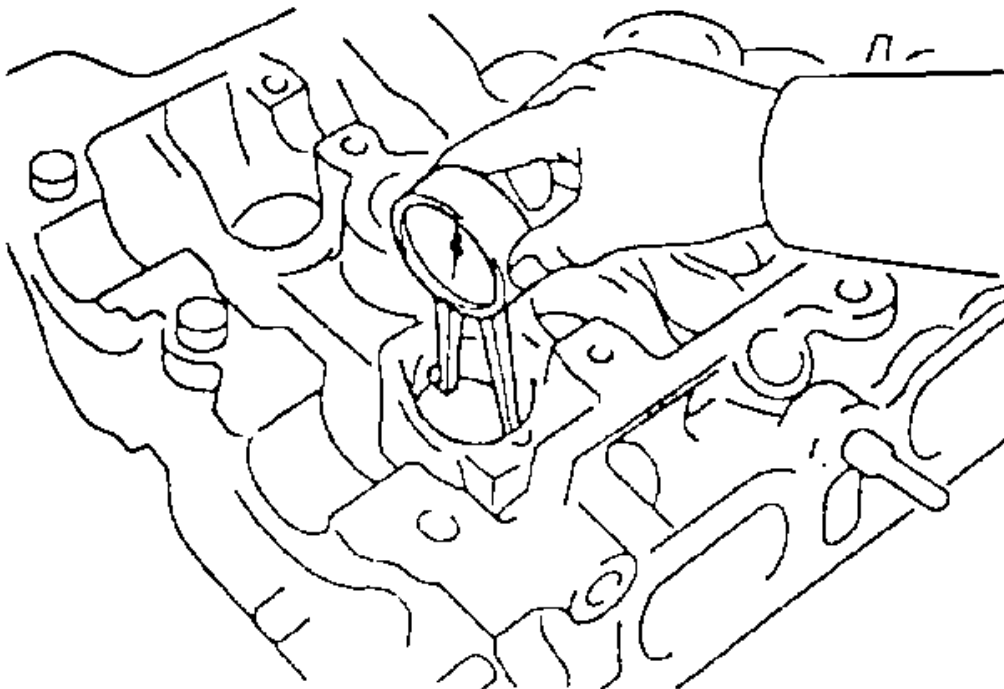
Measuring Clearance Of Valve Lifter Bores
